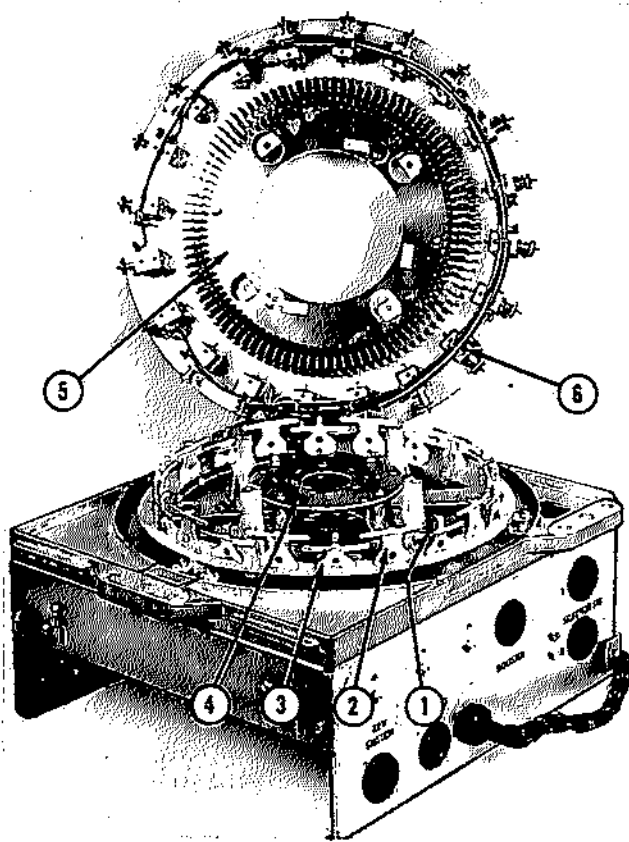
ELECTRIC SELECTOR ASSEMBLY - 2610
